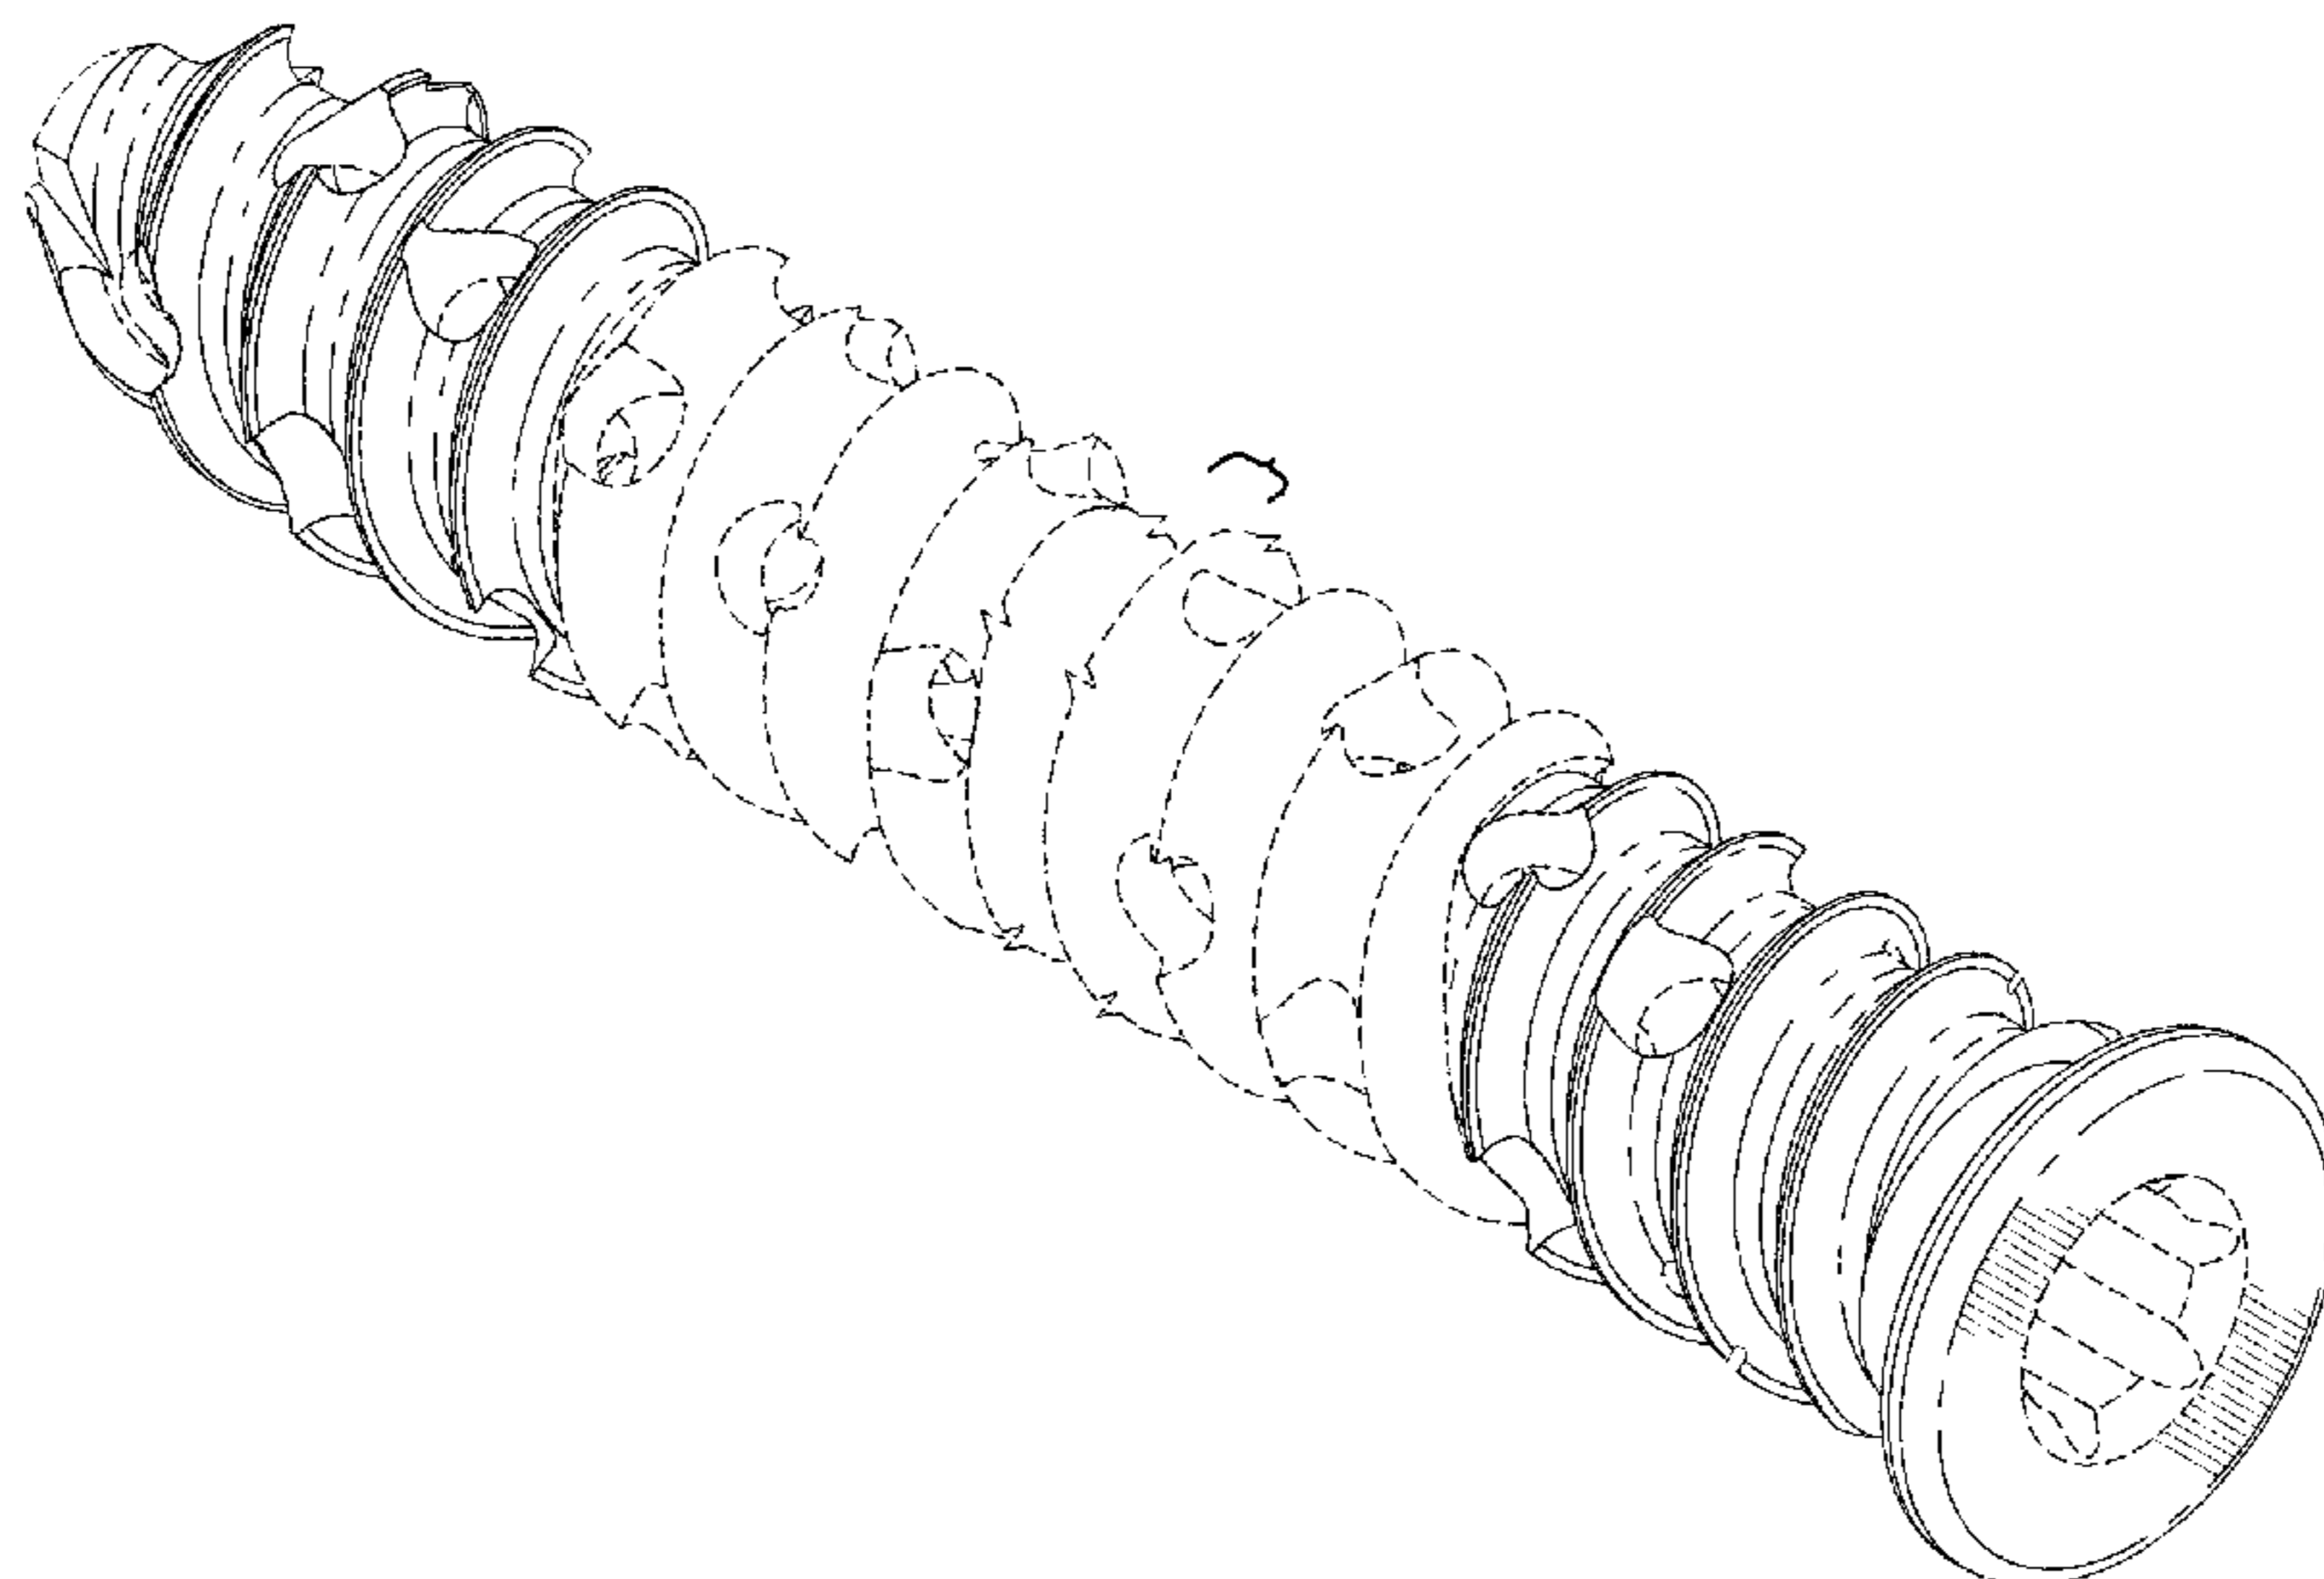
is a front, top-right perspective-view of an embodiment of a bone screw;
